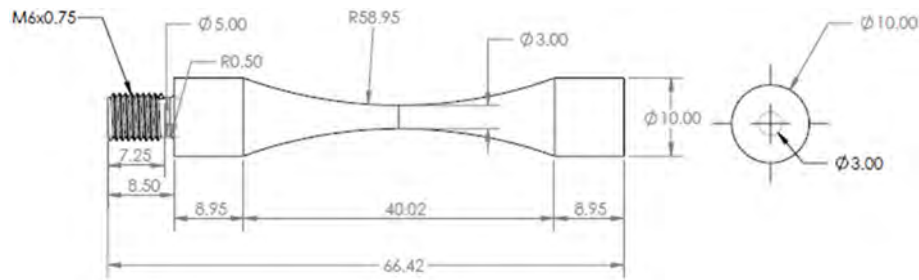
Dimensions of the USF hourglass test specimen (after machining).
